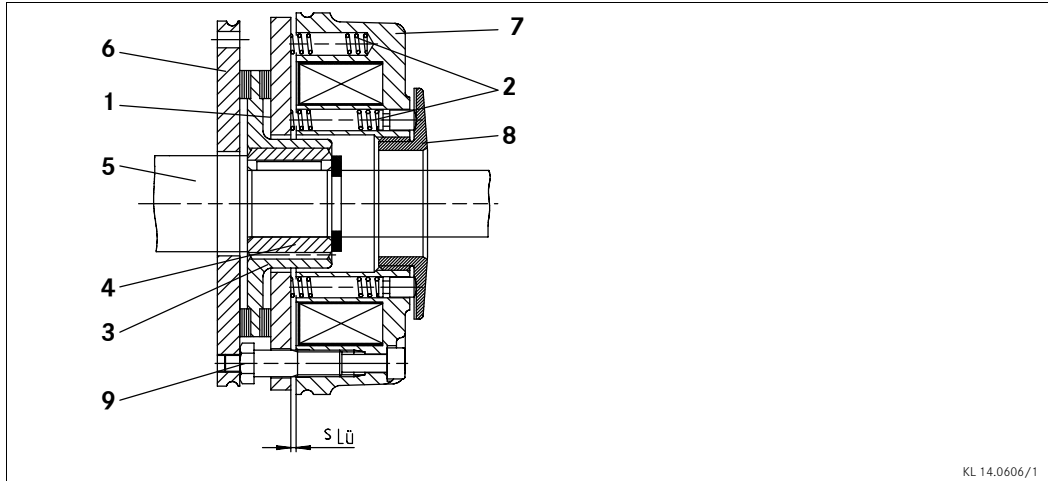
Design of the spring-applied brake INTORQ BFK458: basic module E (complete stator) + rotor + hub + flange
